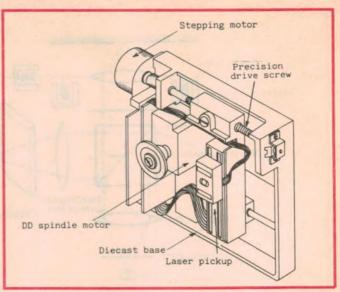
a complete CD mechanism — disc drive, read head drive, laser optics and servo control — housed in a rectangular diecast assembly. (Technics diagram).
